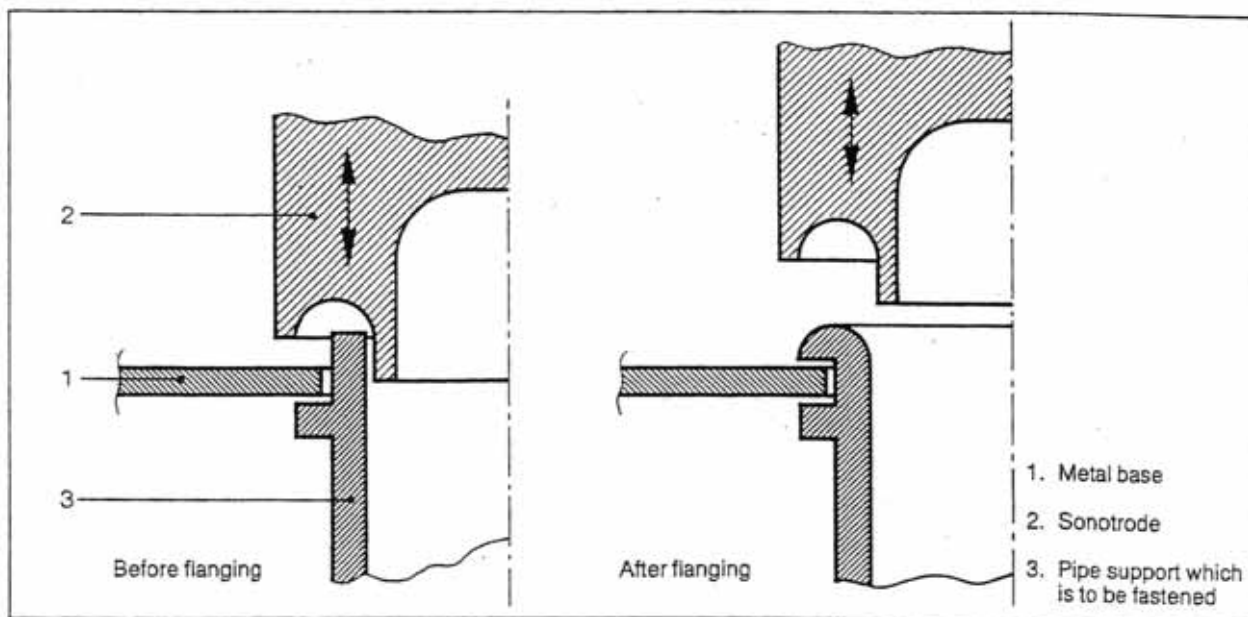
External flanging, fastening a plastic pipe support on the base of a container
